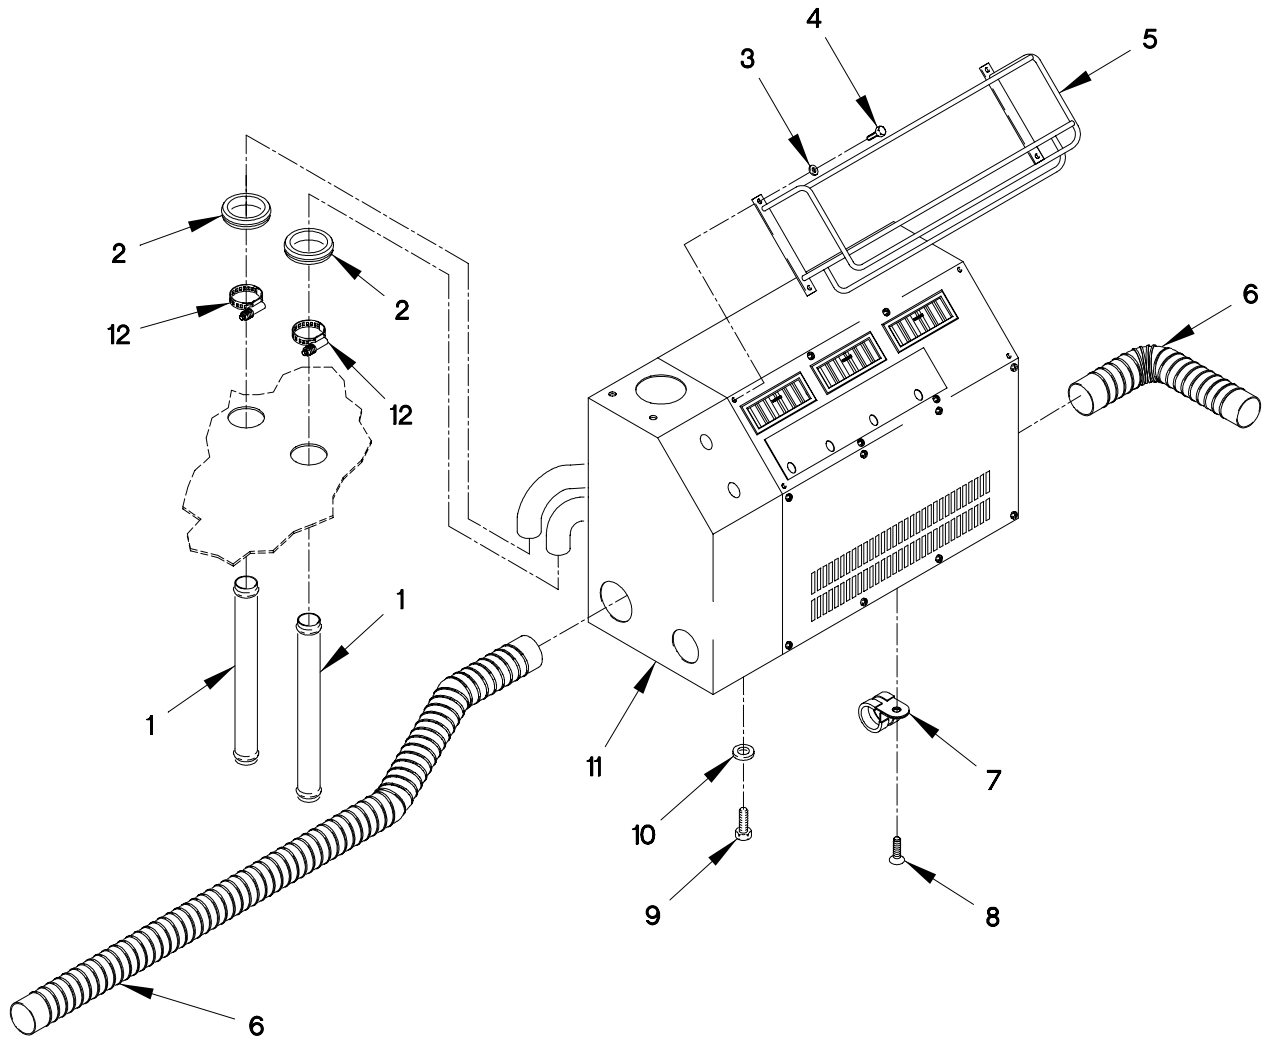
PERSONNEL HEATER ASSEMBLY (SHEET 1 OF 3)
